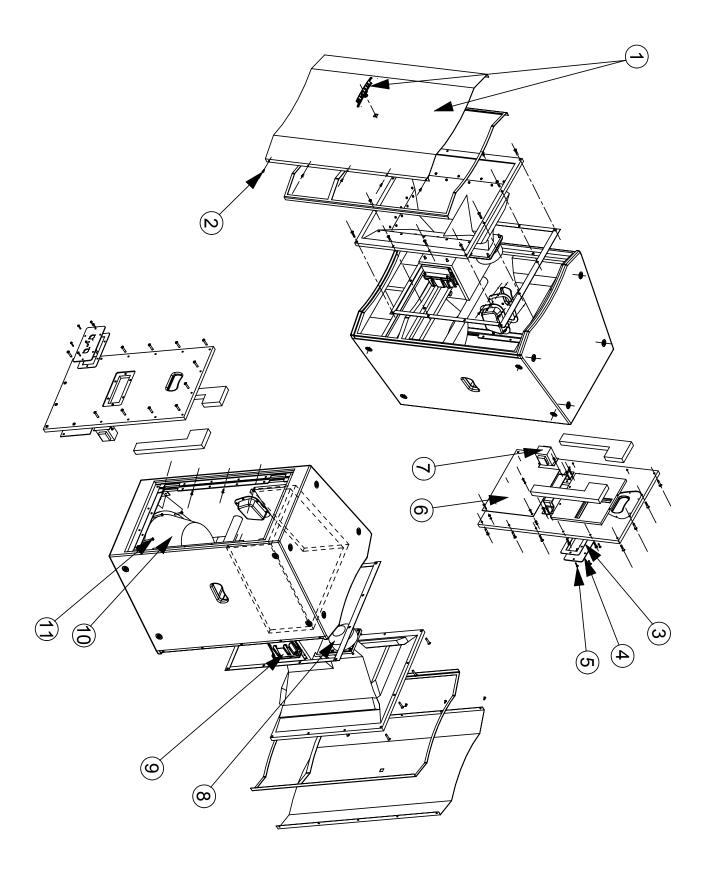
Panaray LT 9403 Loudspeaker Exploded View
